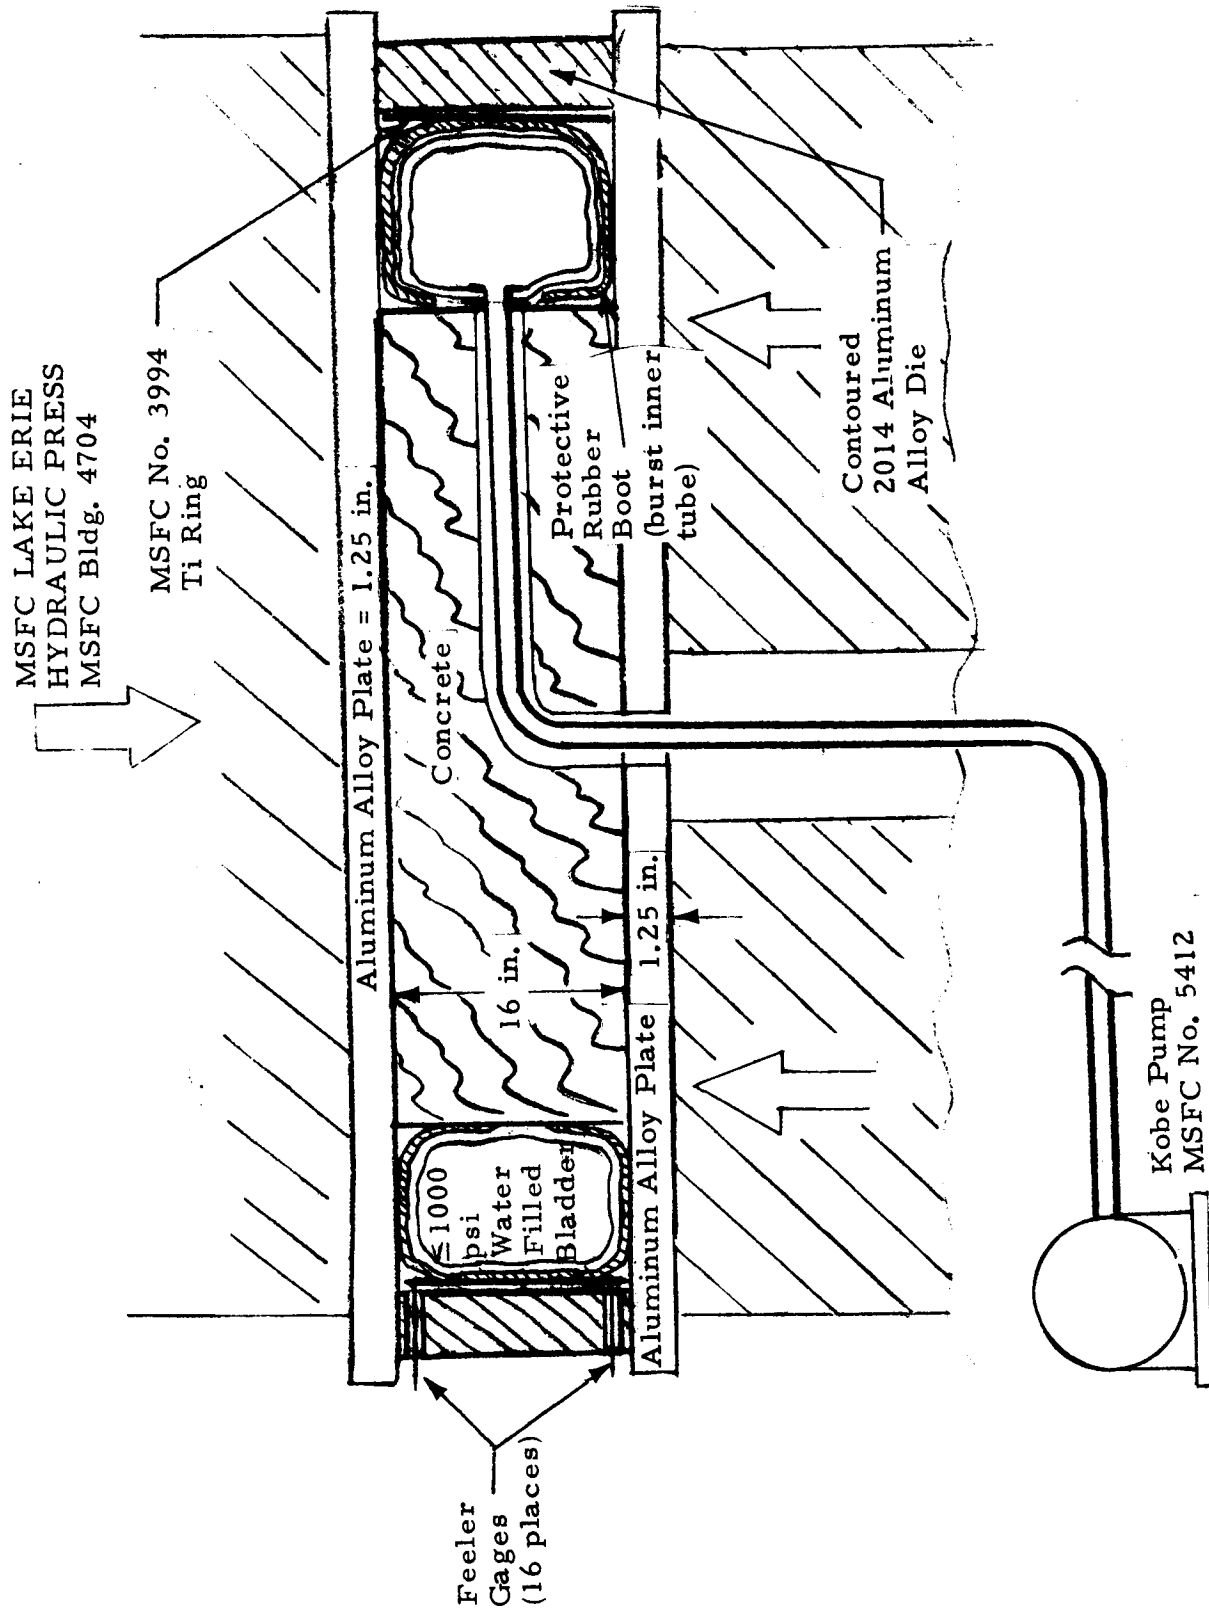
Schematic View of Final Design of Bulge Forming Tool
